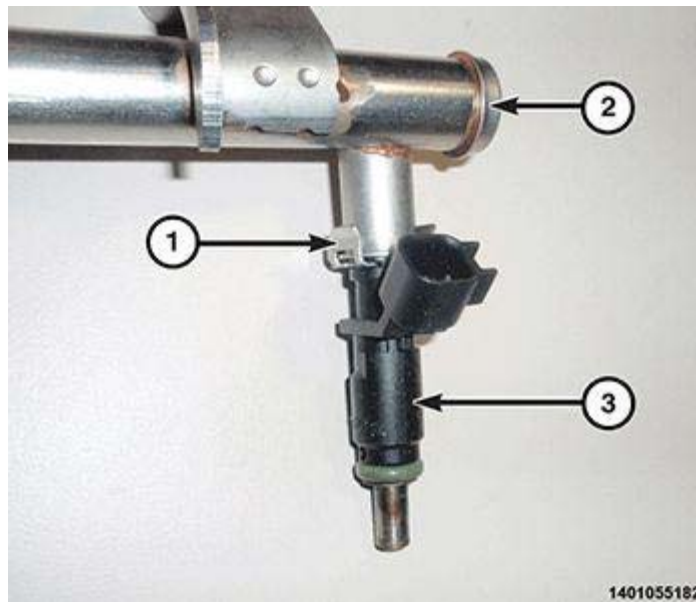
Safety Clips, Fuel Rail & Fuel Injector
